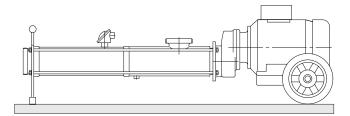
Horizontal dry pump unit setup on chassis, ME design
